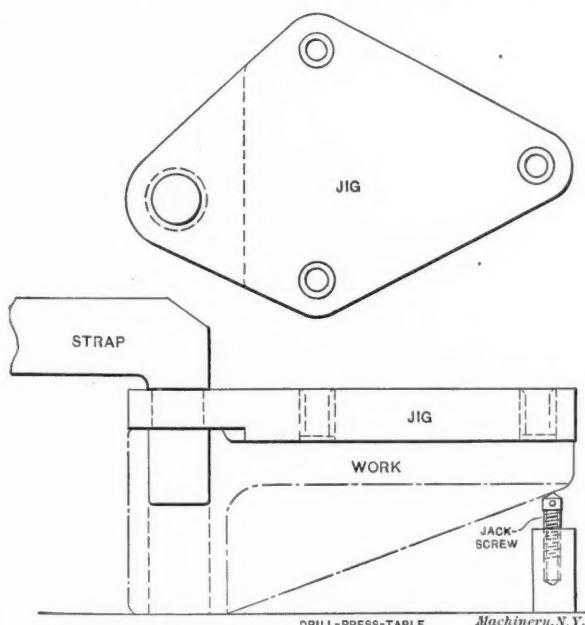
Simple Form of Plate Jig for Drilling Bracket shown in Fig. 97, after Hole E has been bored in the Lathe.
